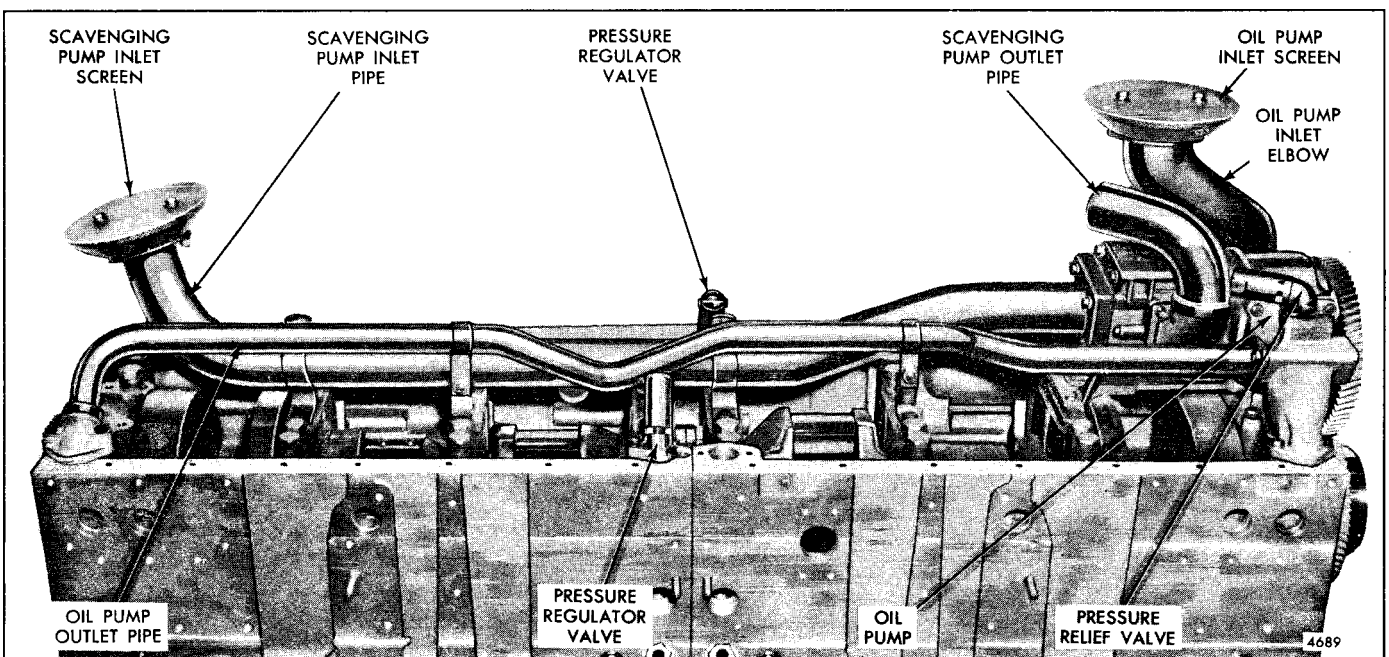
Typical Oil Pump Mounting (Rear Sump)
